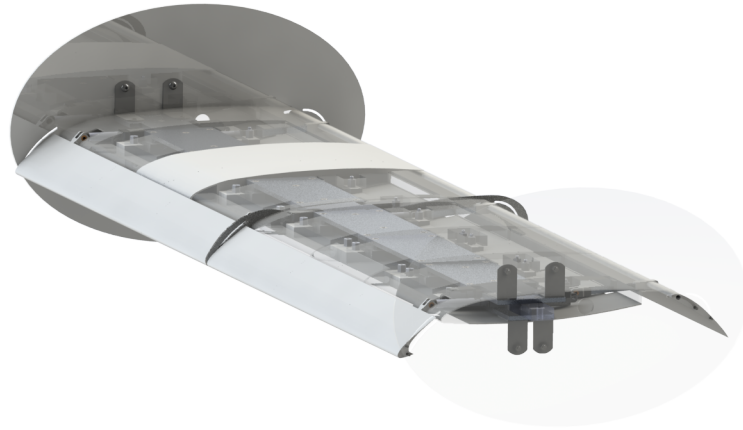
Exploded view of wing prototype SolidWorks model.
